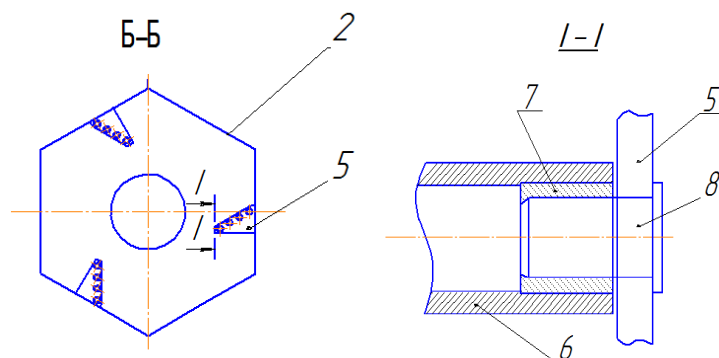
Section of the drum and view of round pipes installed, for example, on rolling bearings
